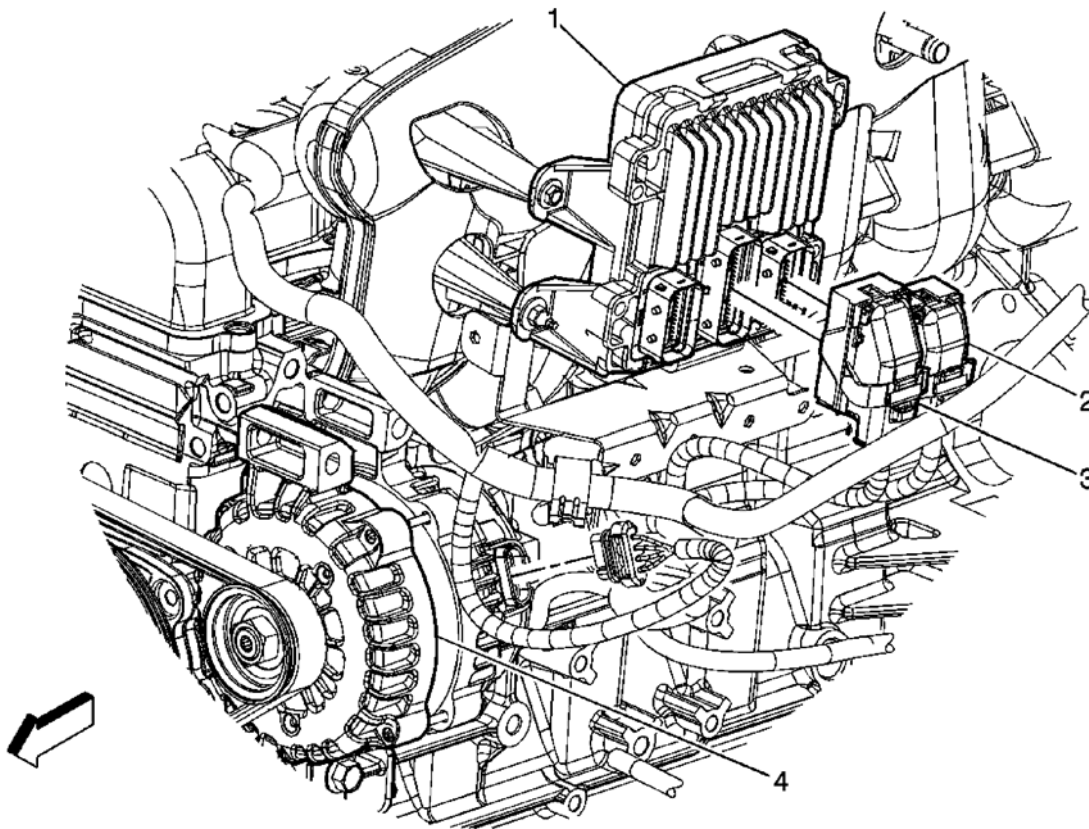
View Of Upper Left Side Of Engine - Front (4.2L)
